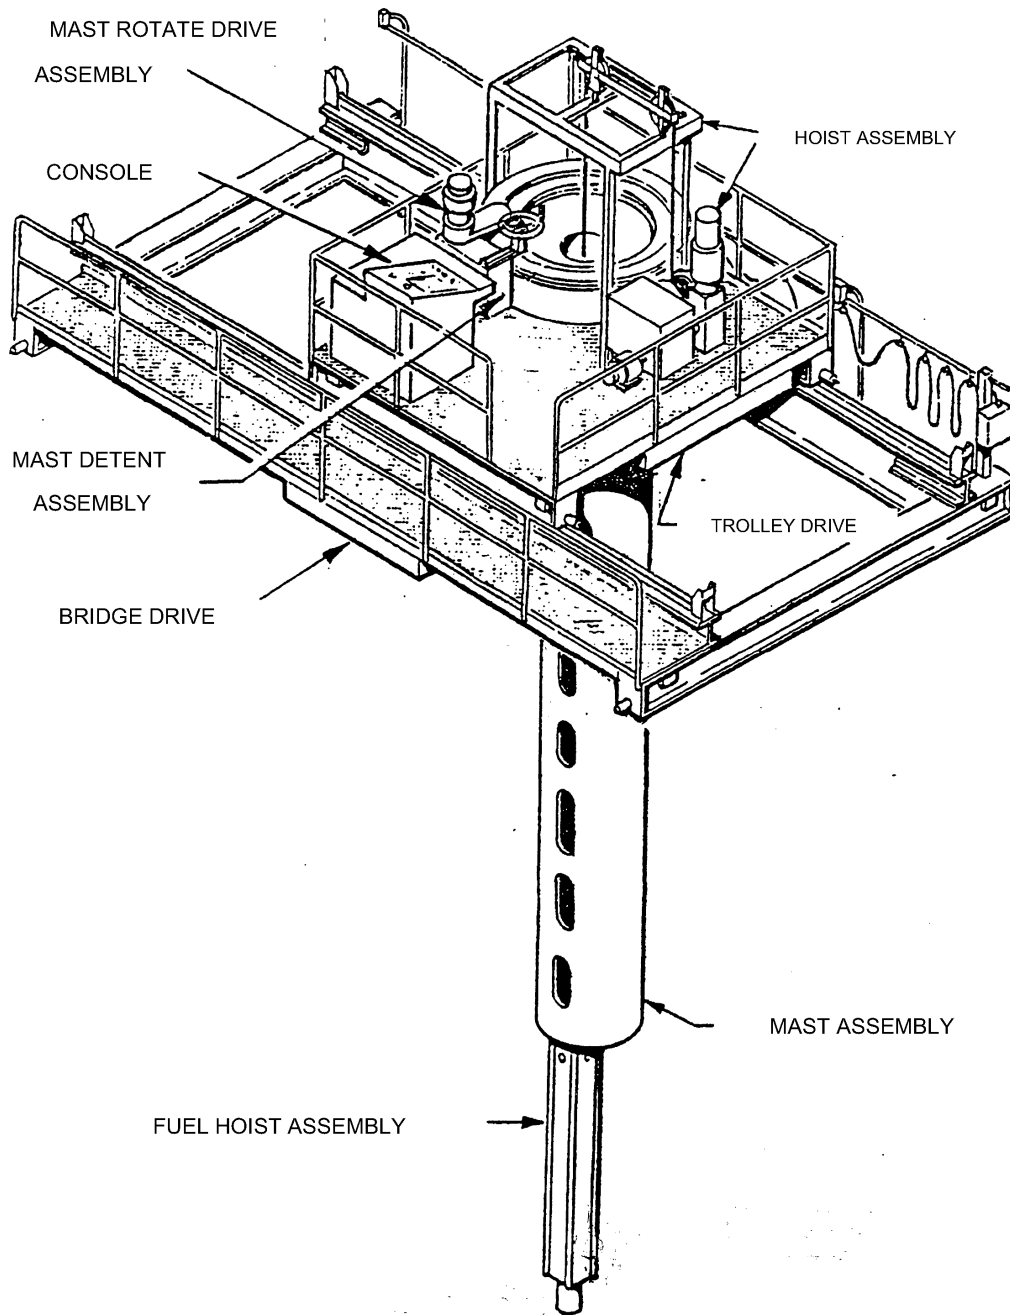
REFUELING EQUIPMENT ARRANGEMENT
